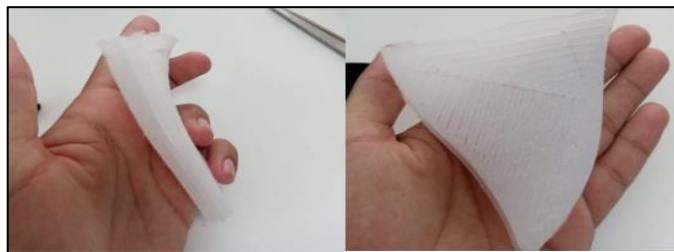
Complete fabricated fin, gluing half cured fins together.
